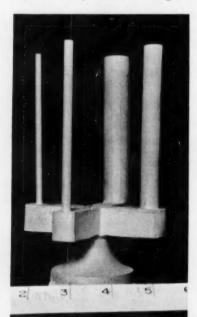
Rigging used on ½, ¼, ½, ½ and ¾-in. diameter investment cast slugs.
